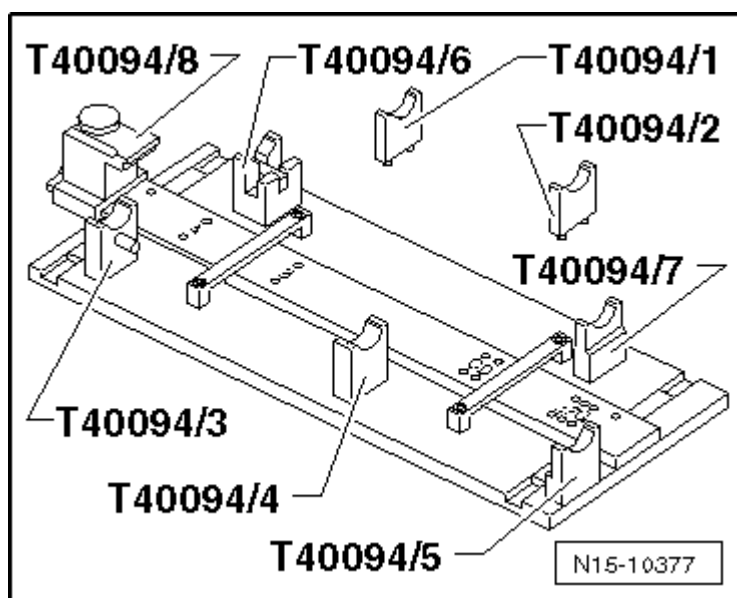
Identifying Mounts T40094/1 To T40094/8
